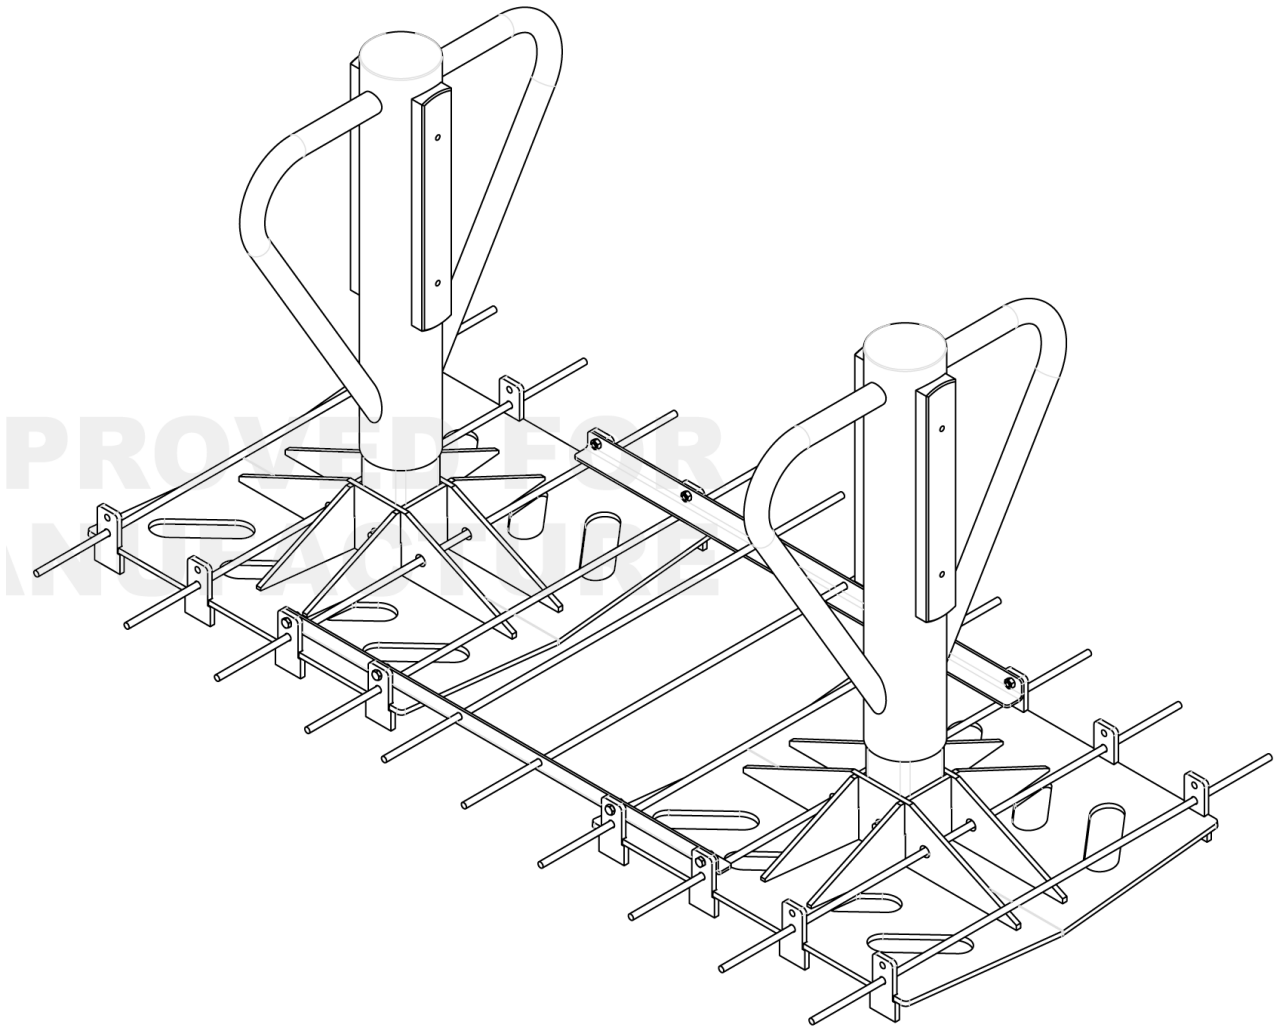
Isometric assembly view of Protect Tandem Cycle Parking with Protect Dual Core, taken from drawing BSSMAN2607\_0
